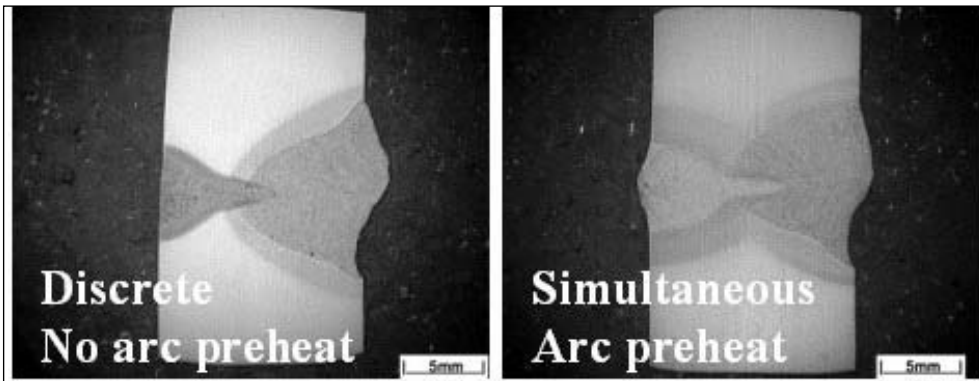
Sections of discrete and dual process welds in 13 mm thick grade X52 steel plate (laser weld left, arc weld right). The welds were produced at 1 m/min.
